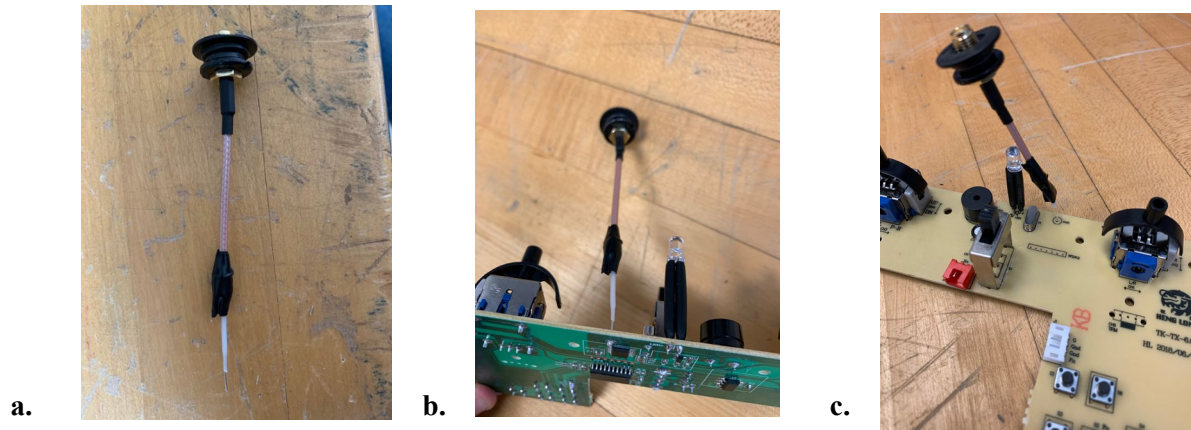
Modification of stock radio controller for tank: a. Extension pigtail cable, b. Insertion through PCB board, and c. Top view of completed attachment
